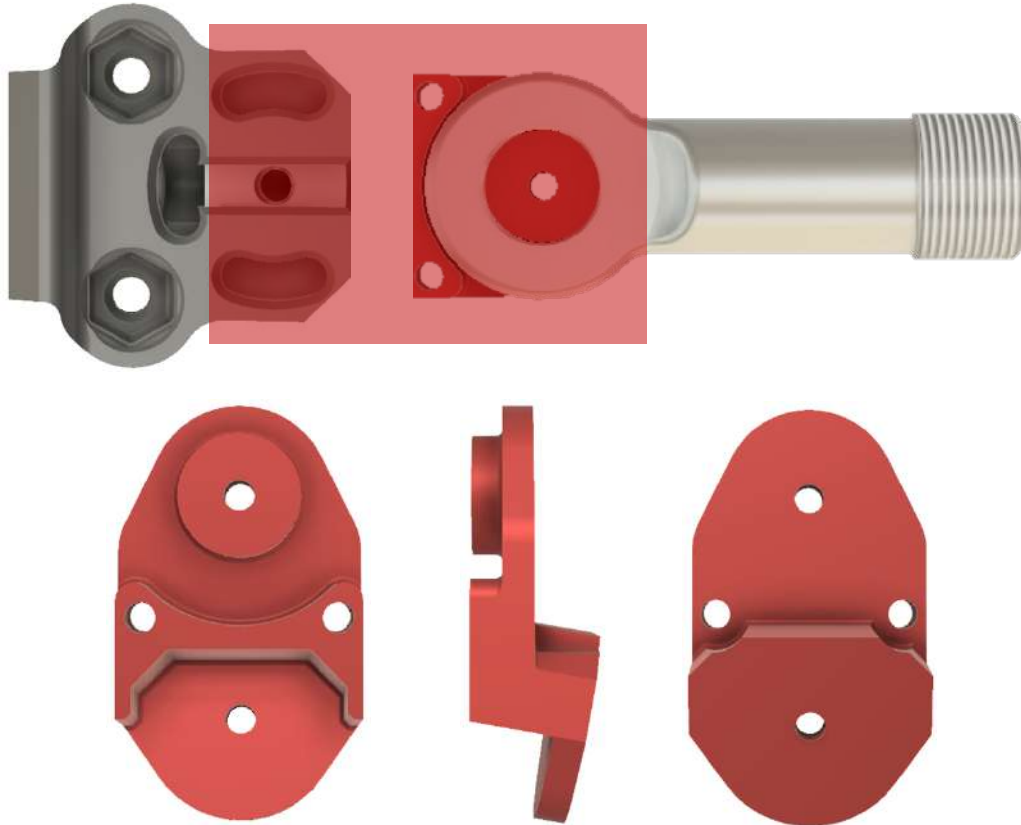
ADJUSTABLE TUBE ATTACHMENT DEVELOPMENT
